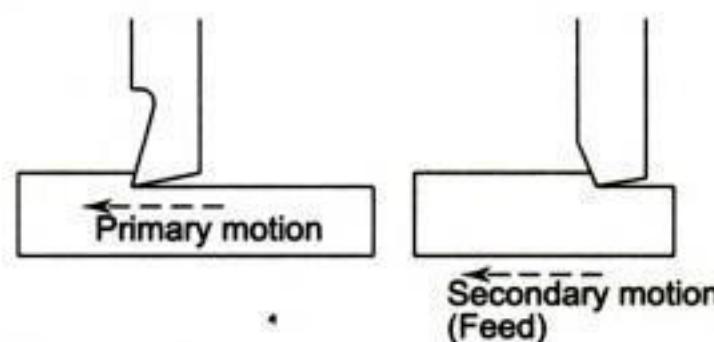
Generating a flat surface with linear motion of a single-point cutting tool.
